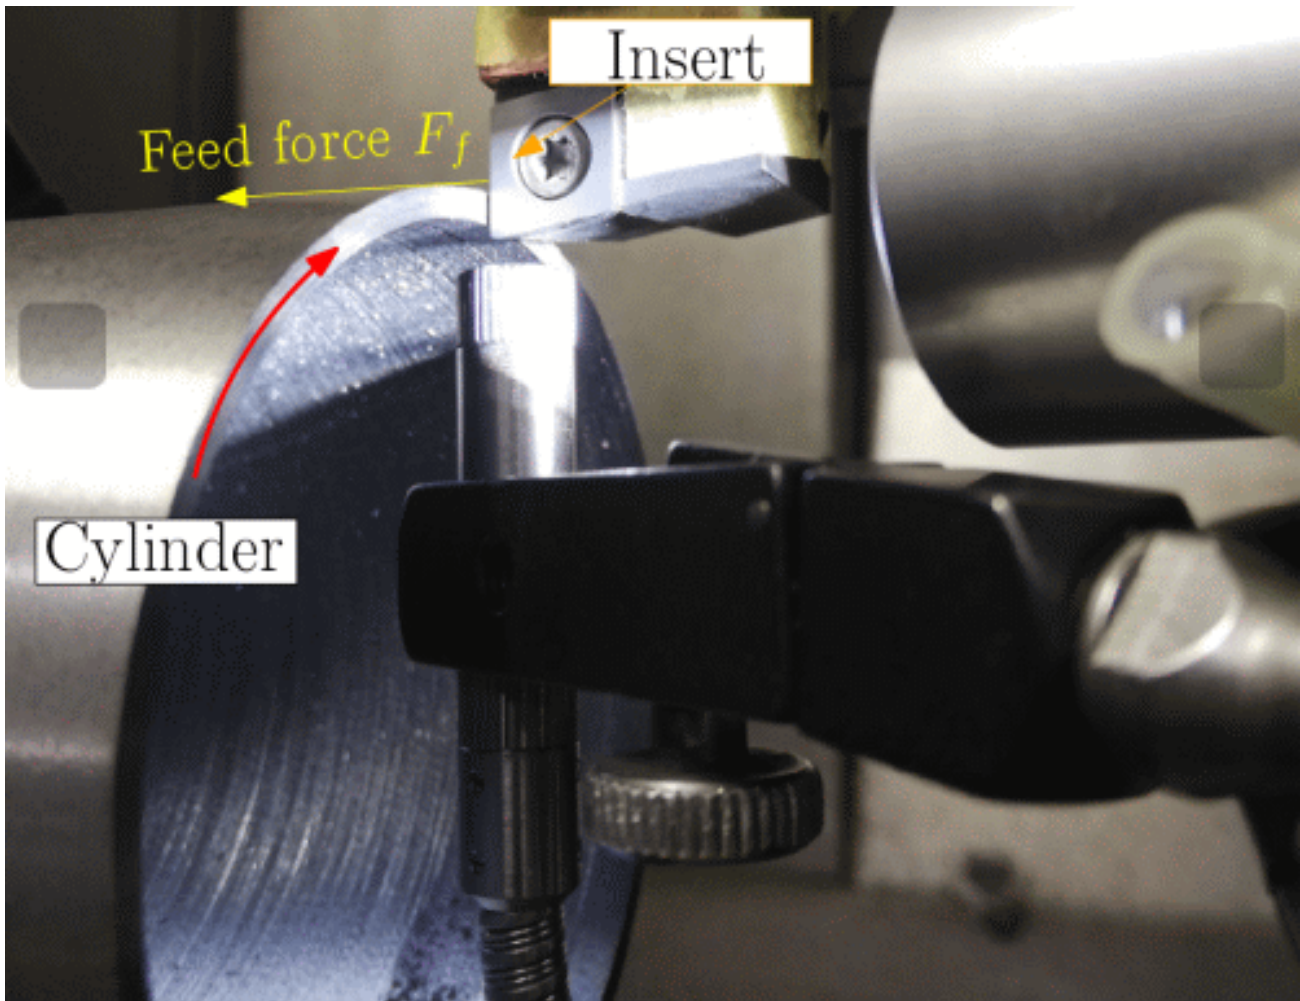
Orthogonal cutting setup: insert attached to the tool holder with cylinder to cut.
